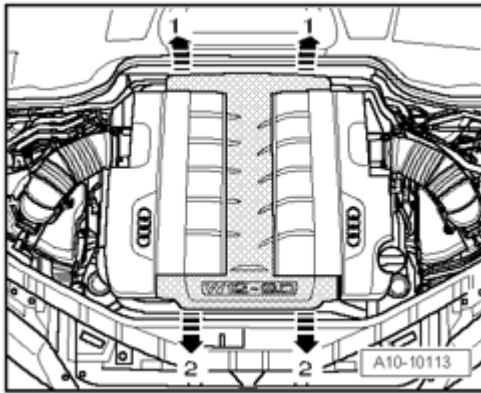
Pulling Engine Cover At Rear And Middle Upward And Off & Pulling Engine Cover Forward And Off Of Intake Manifold
